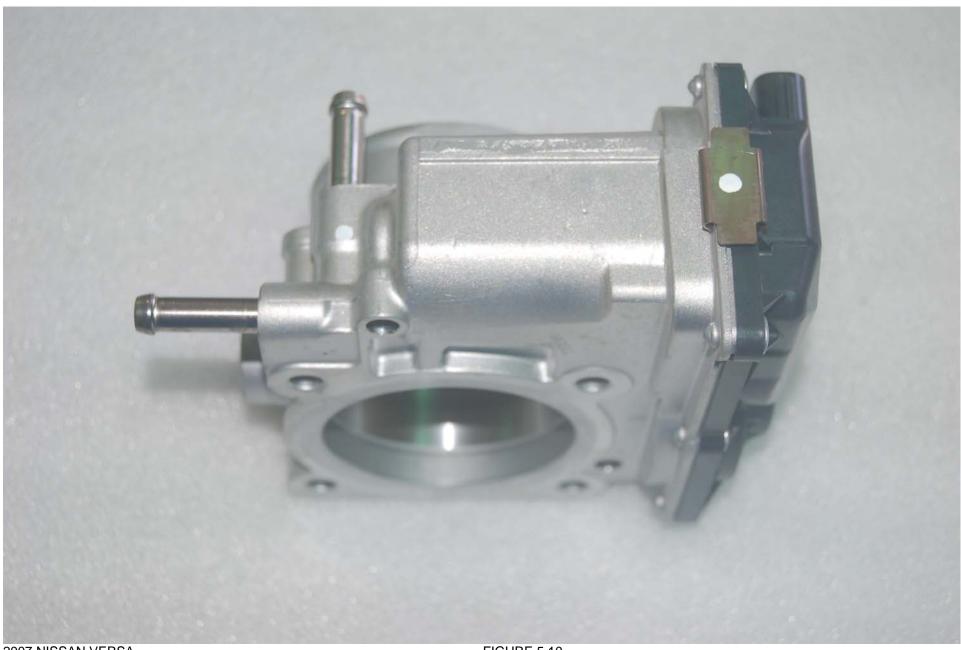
THROTTLE BODY ASSEMBLY
